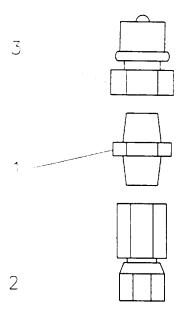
Bradley Engine Compartment Extinguisher Adapter Repair
